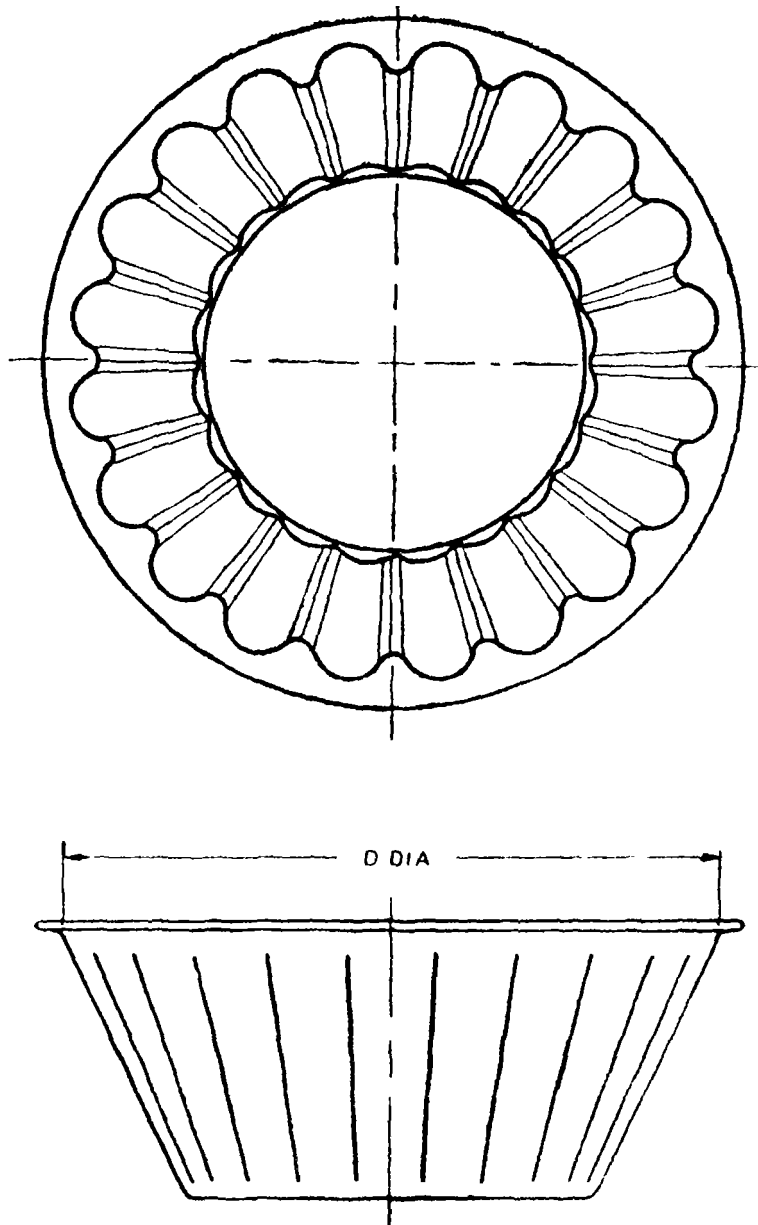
PANS, PATTY (JELLY MOULD) FOR BAKING
